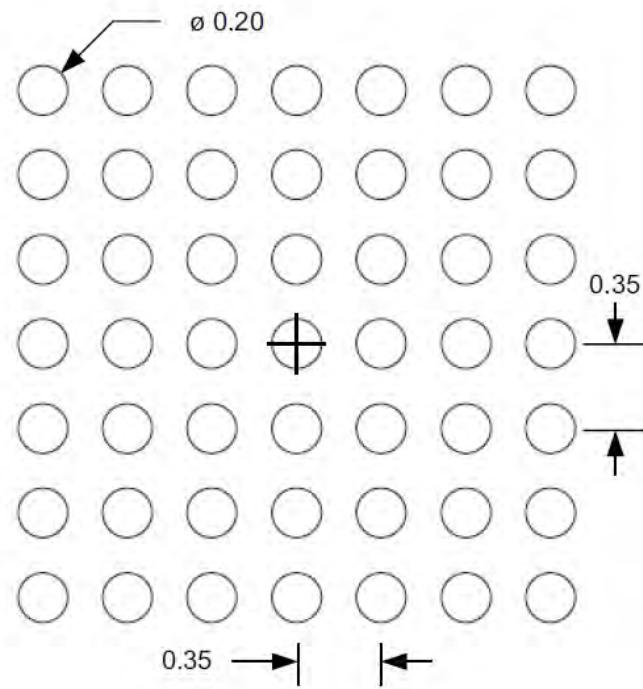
Example Solder Stencil Pattern for CSP Package
